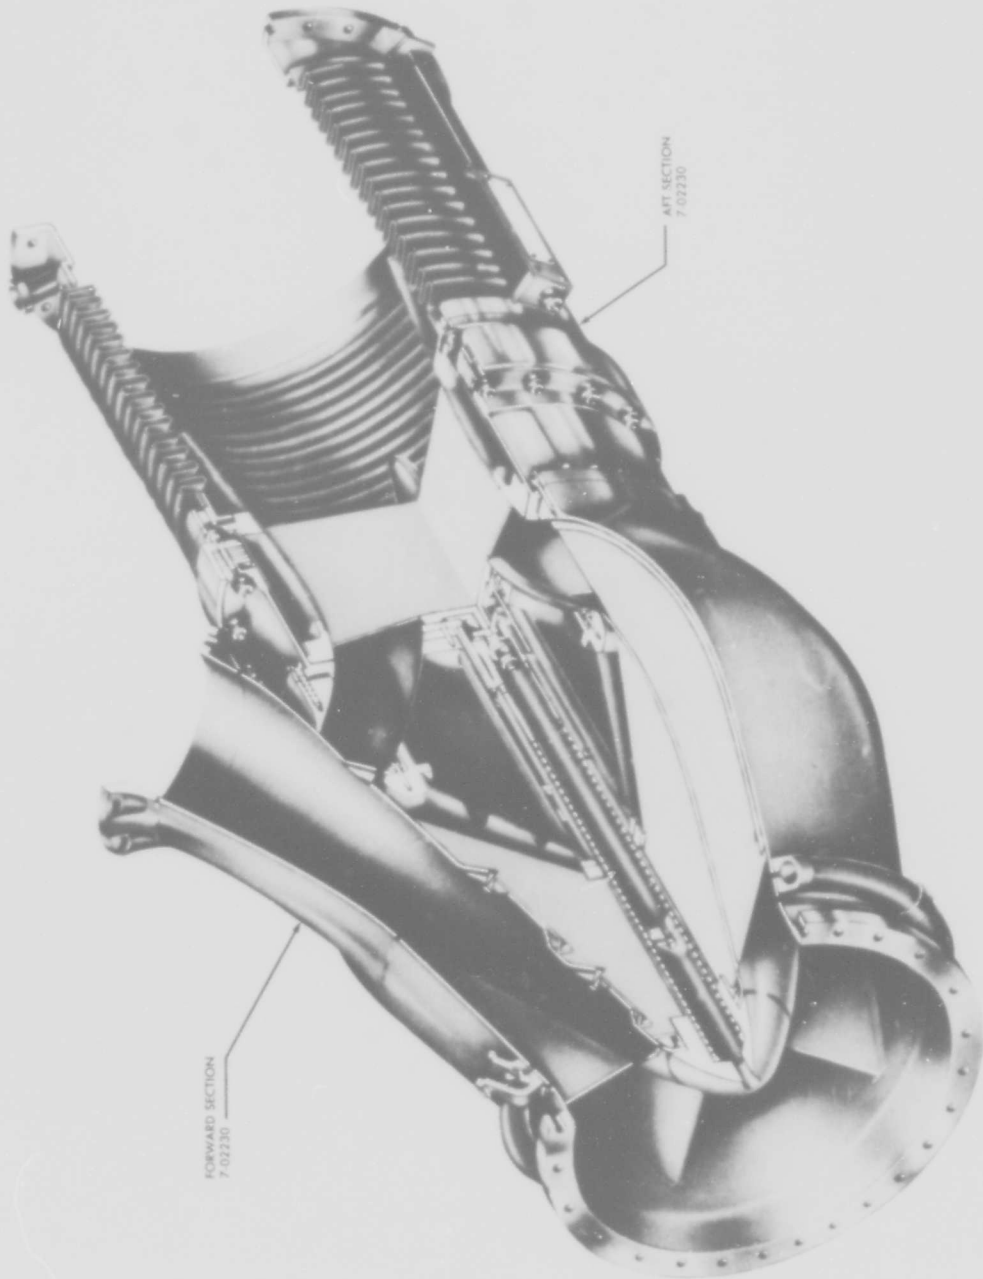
Booster Disconnect Liquid Oxygen Valve Assembly
